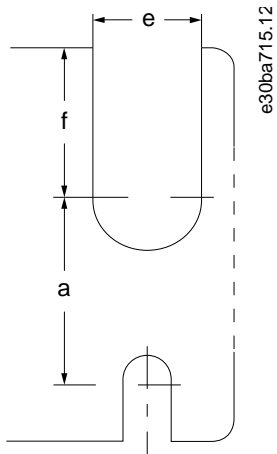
Top and Bottom Mounting Holes, Enclosure Sizes B4, C3, and C4
